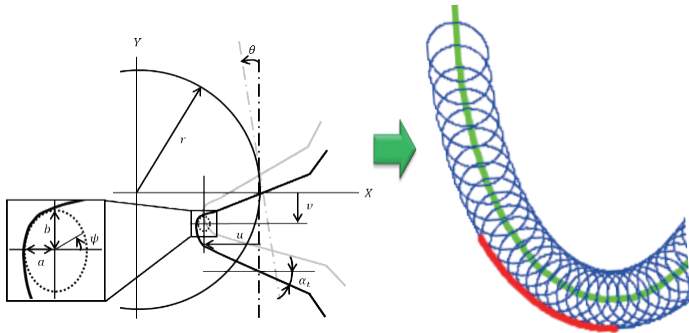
Simulation for calculating the tooth root geometry in the perpendicular cross section
